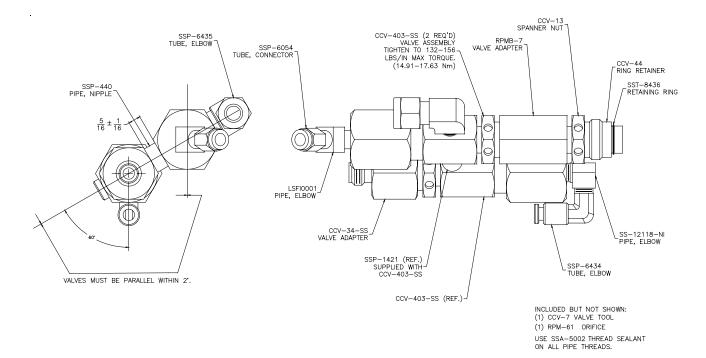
RPM-416 2-Valve Assembly - Trigger and Dump
